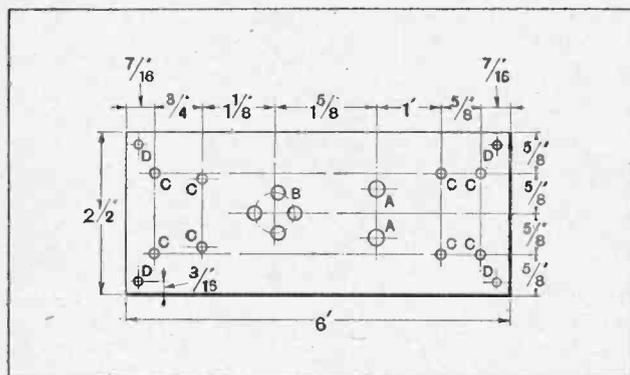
Drilling details of the ebonite panel. Sizes of holes are as follow: A, 1/4 in. dia.; B, 3/16 in. dia.; C, 1/8 in. dia.; D, 1/16 in. dia.
